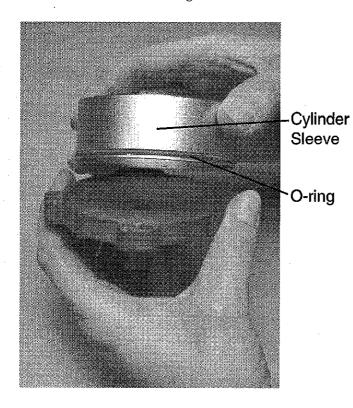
Separating the Cylinder Sleeve and Valve Plate
